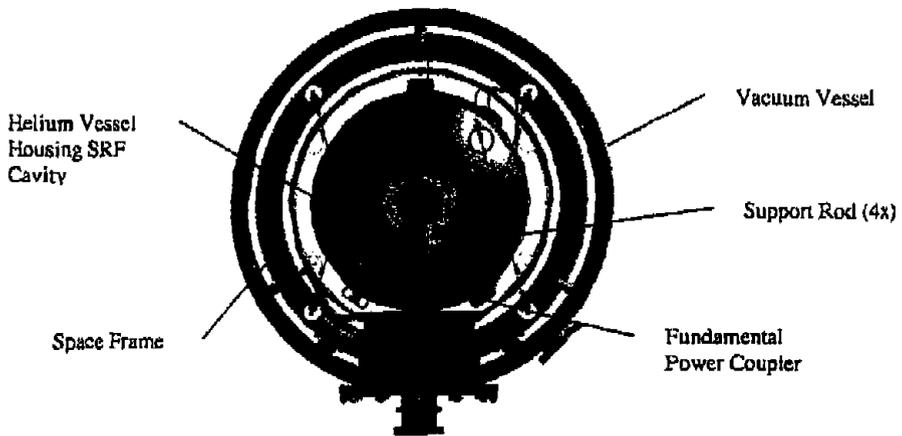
Nitronic-50™ support rods attach the helium vessel assembly to the space frame.
